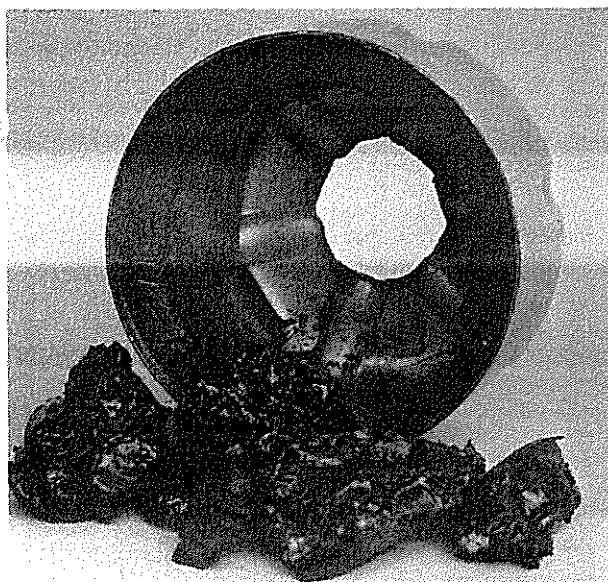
Section of Rotor Showing Level of Contaminant Removed from Engine 3 after 384 Hours
